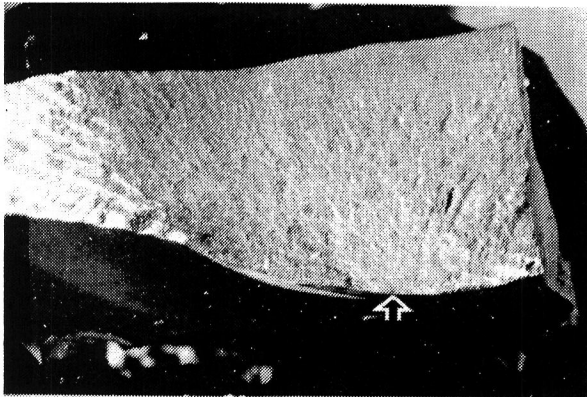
Reconstructed rotor and stub shaft (the arrow points to the rotor fracture origin).
